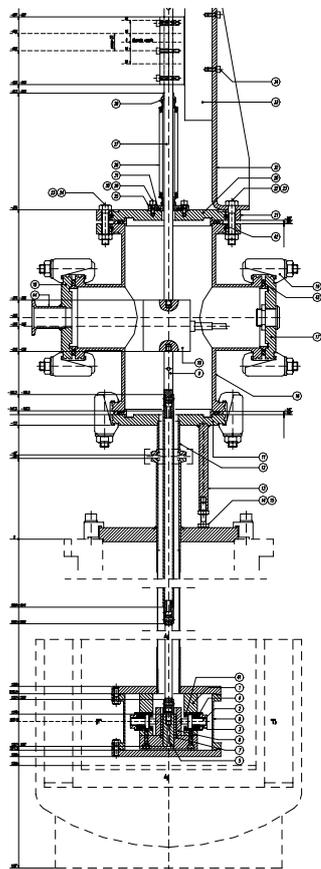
Schematic drawing of the system developed for the sliding fixture measurements.
